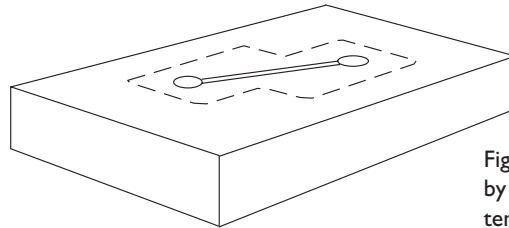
Pre-drilled holes connected by a saw-cut, before hardening and tempering, will help to prevent distortion or cracking when wire eroding thick sections.
